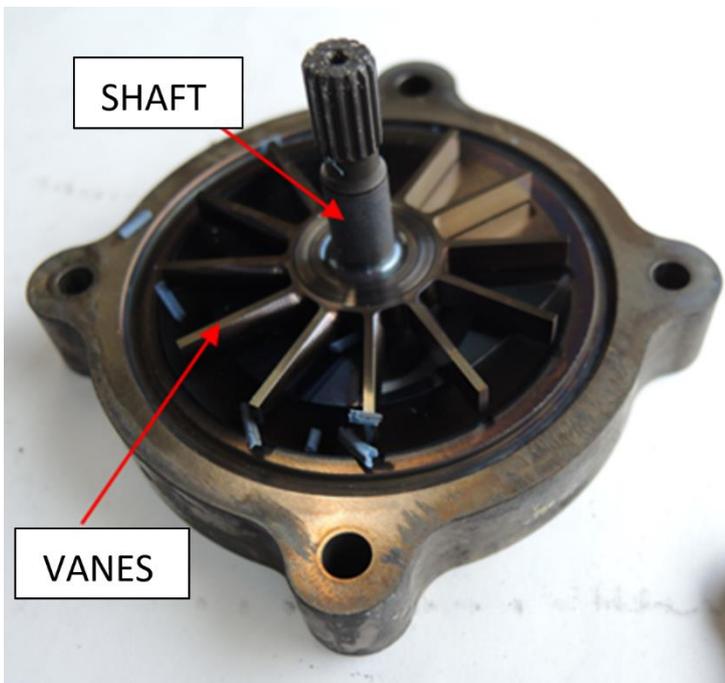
The vanes and shaft in the low-pressure part of the fuel pump. Small bits of the interior blue gasket were further fragmented and fell off during disassembly. Photo: NSIA
